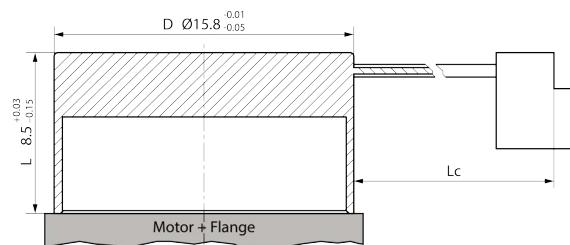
ENX 16 EASY / ENX 16 EASY Absolute – Dimensional Drawing [mm]
